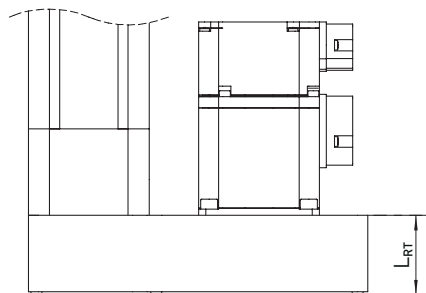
HM-S linear axis motor connection with belt drive
